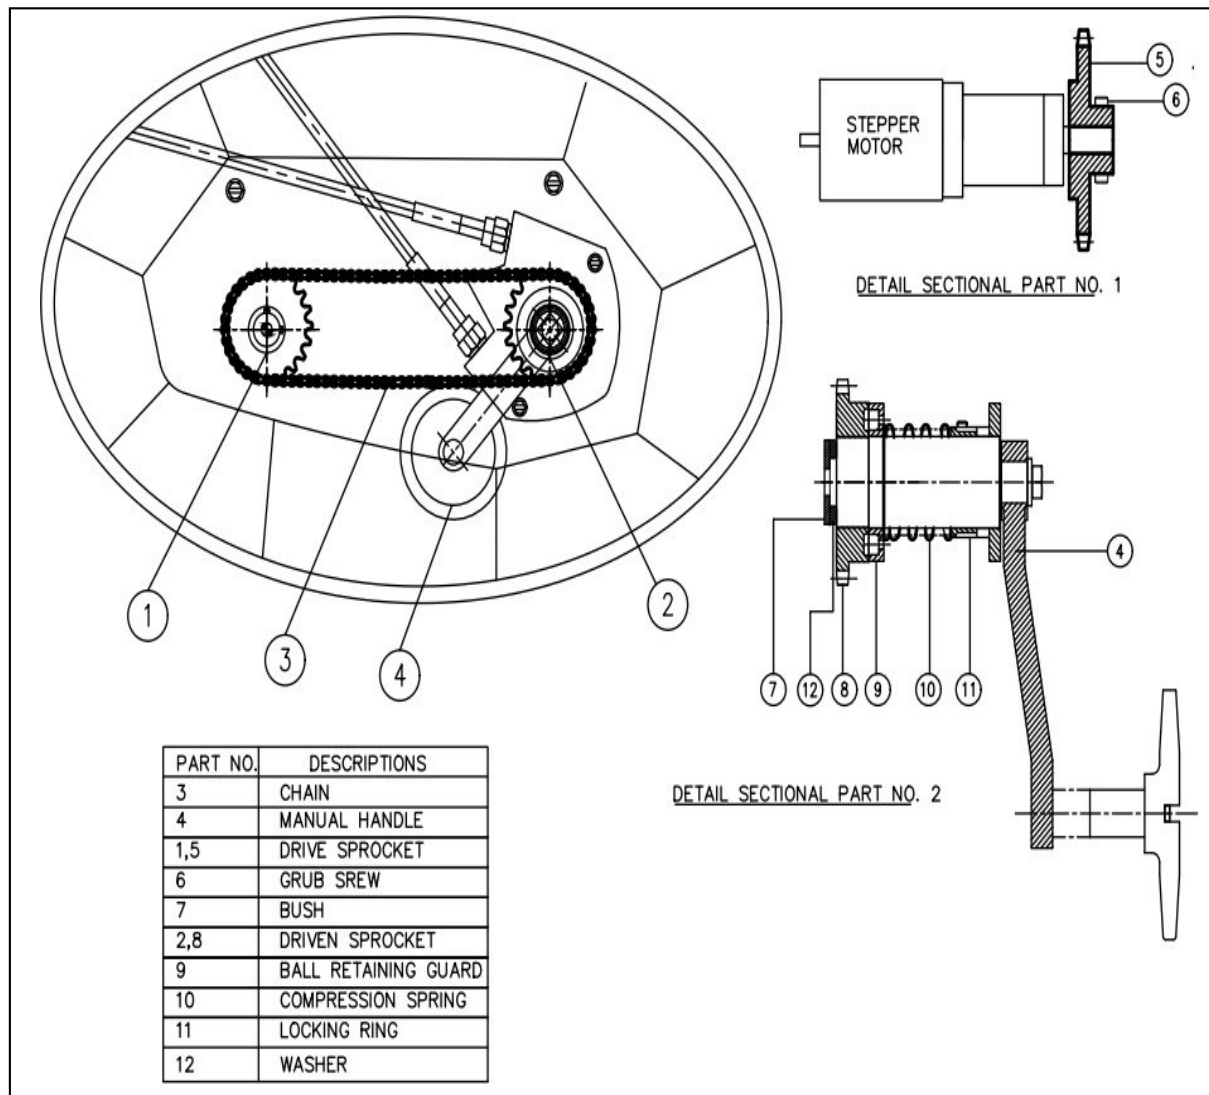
Chain Sprocket & Associated Assembly for Automated Cranking Operation
